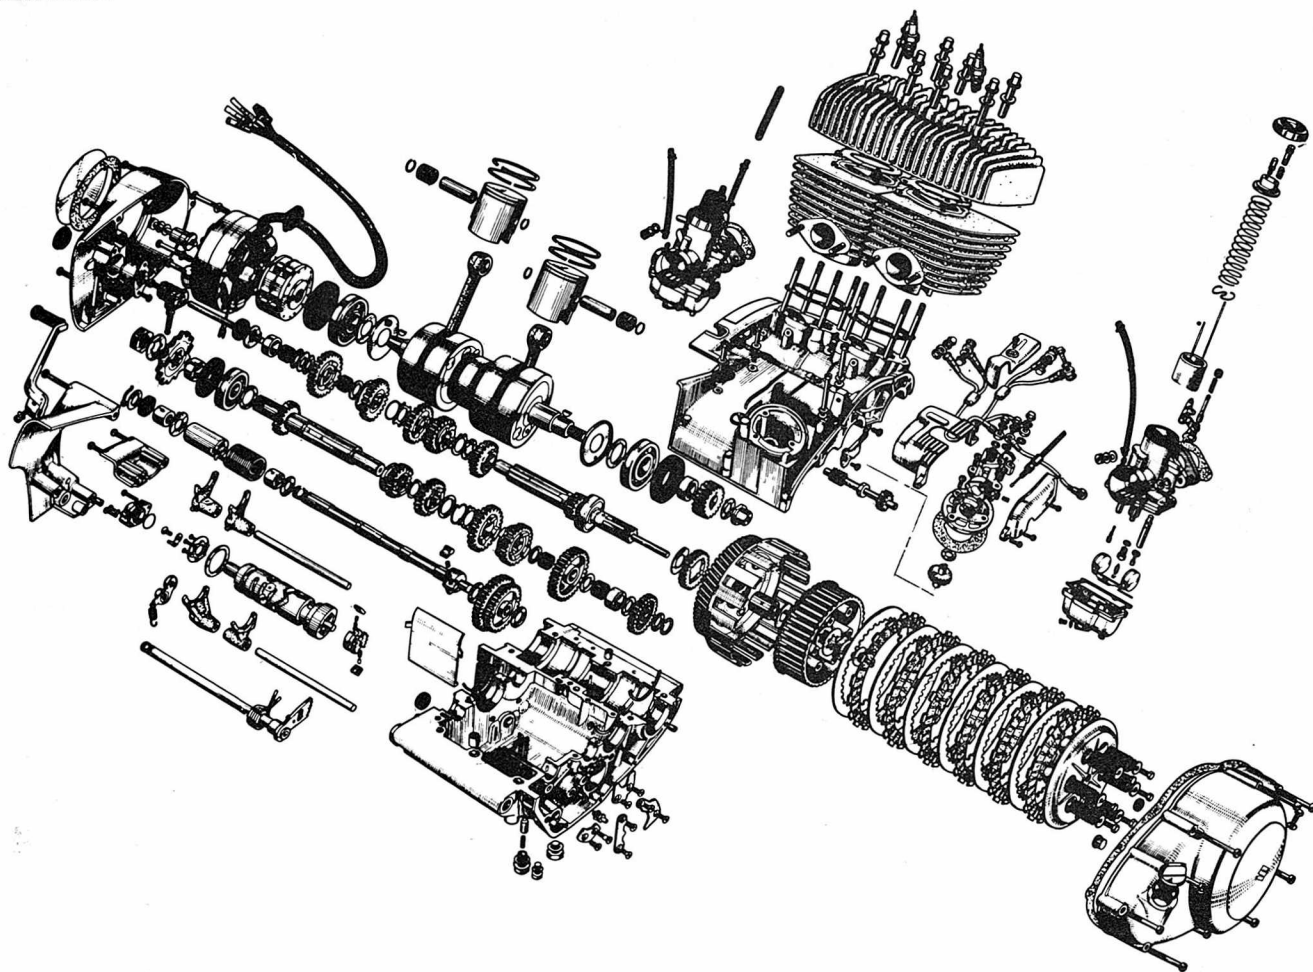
Exploded view of 305cc engine and transmission assembly. Other models are similar with the addition of shifter brak
